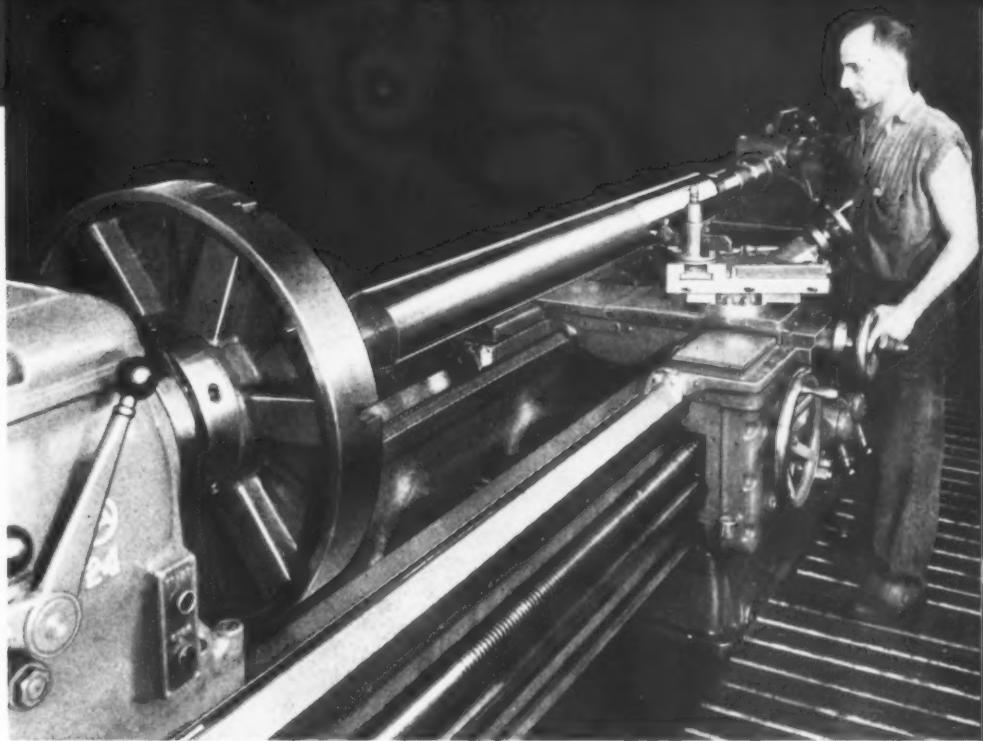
Pipe Threading and Cutting Machine Engaged in Cutting the Threads on a 6-inch Pipe
